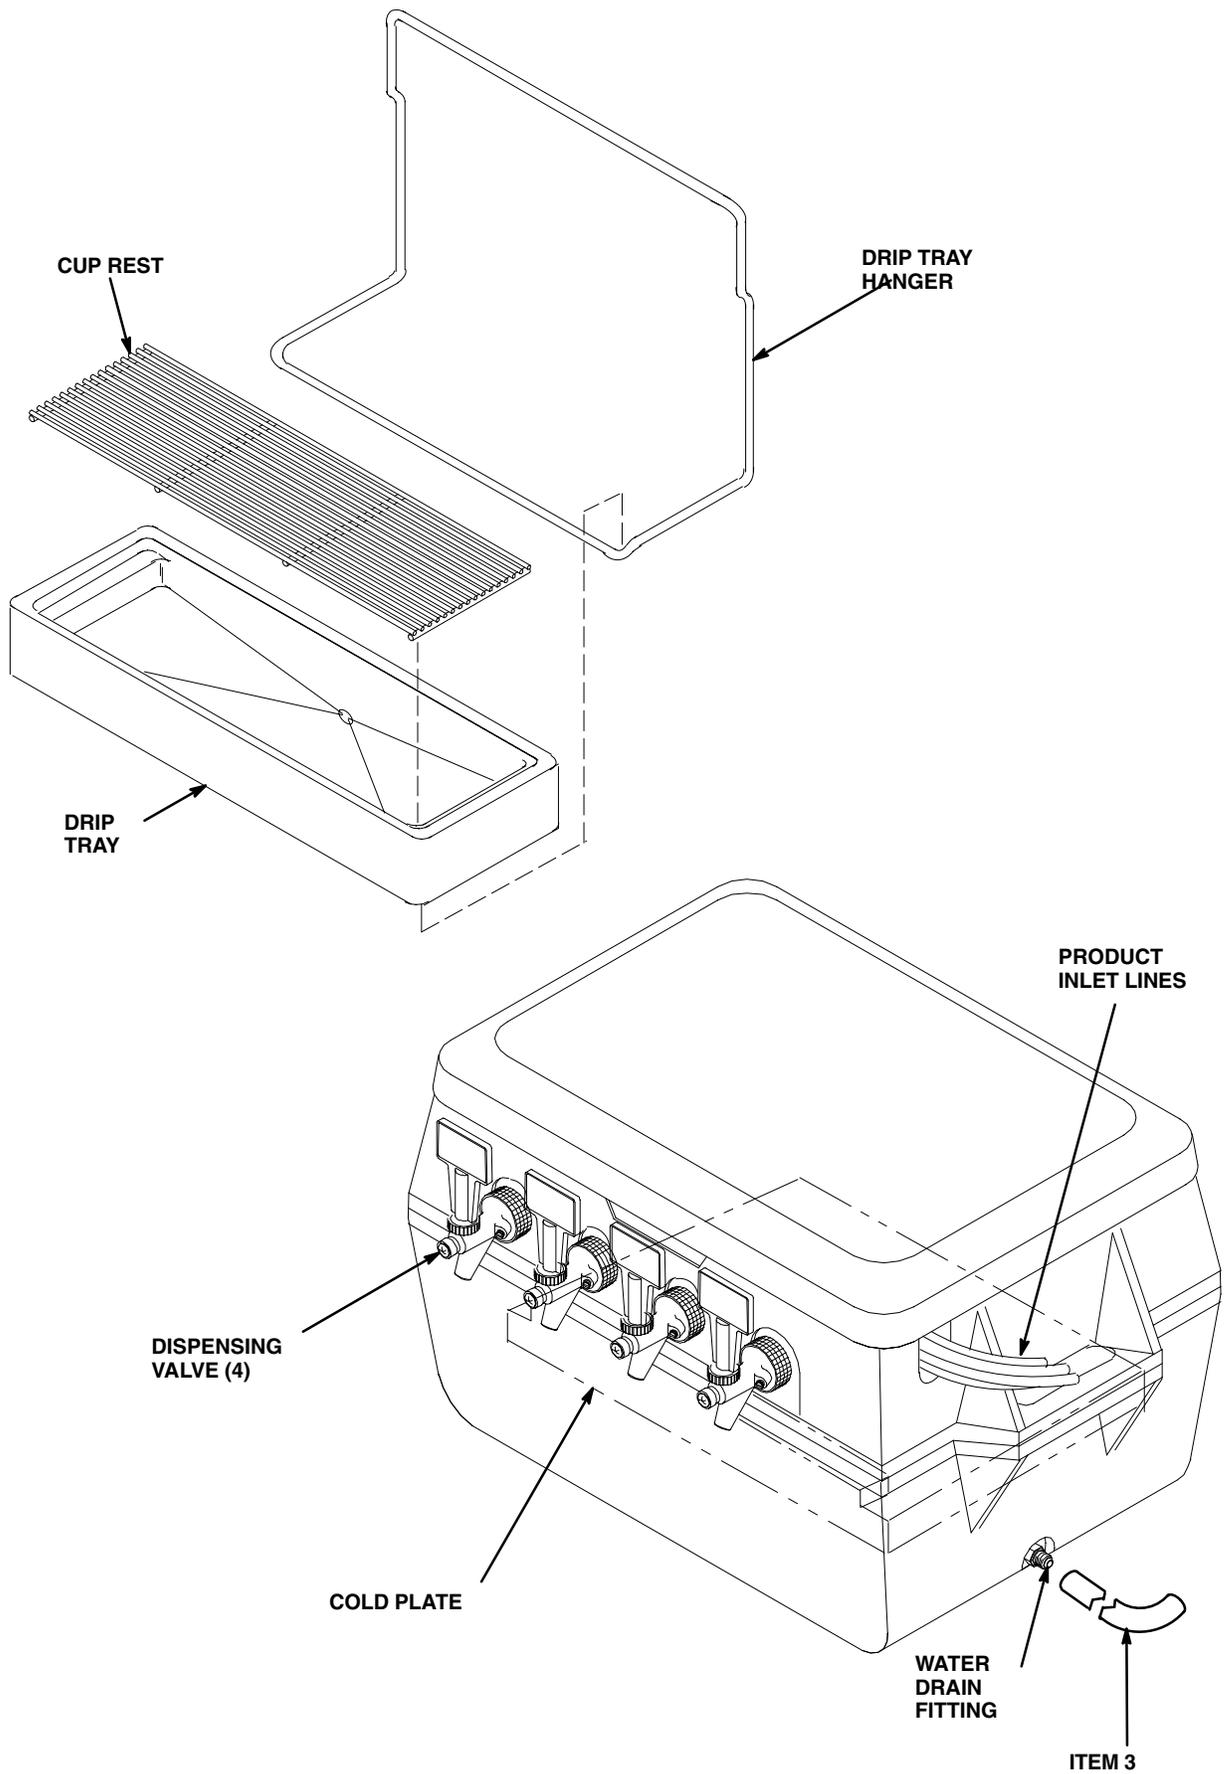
PARTS IDENTIFICATION (FOUR-FLAVOR UNIT SHOWN)
